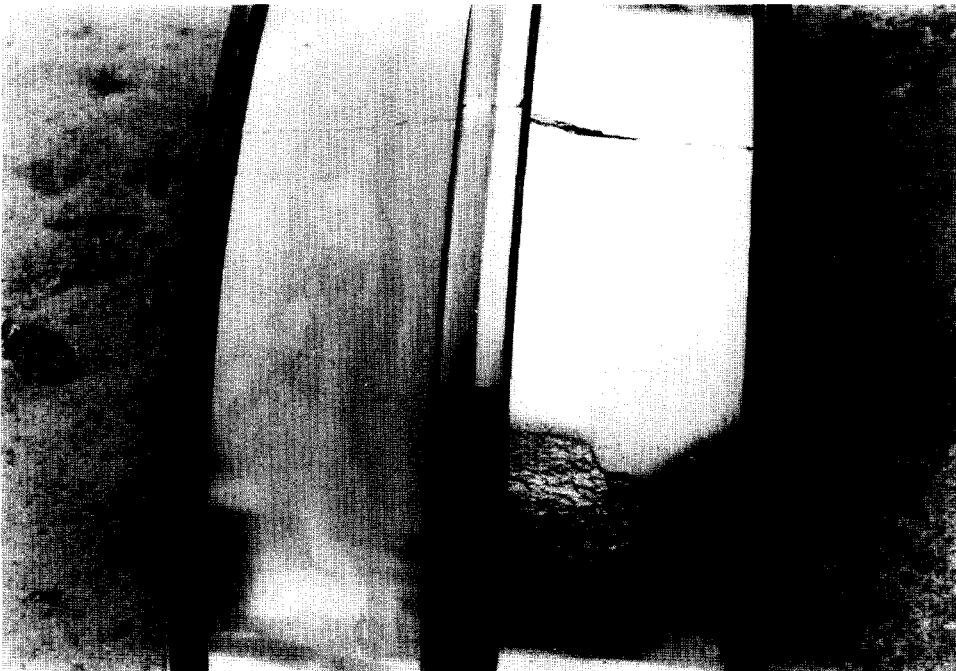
Localized flaking damage on the inner ring of a thrust bearing.
